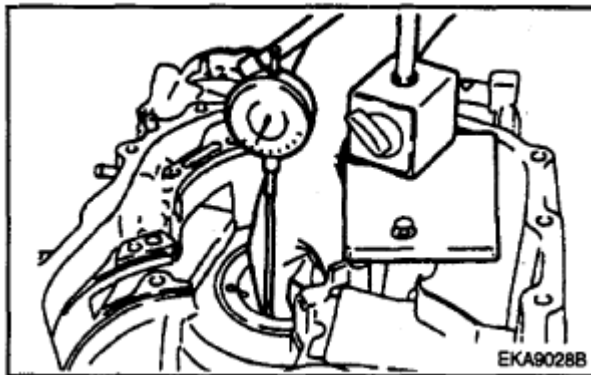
Locating Differential Outer Race Using Special Tool (09453-2F100)
